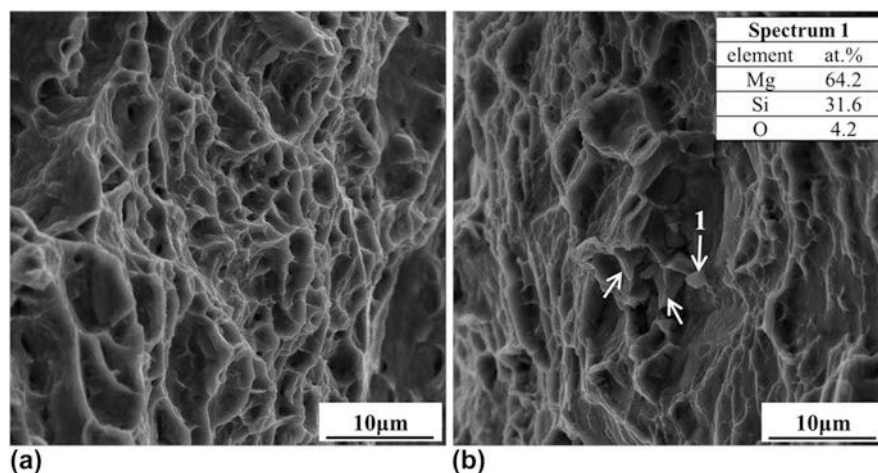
Tensile fracture surfaces of as-rolled Mg–3Al–Zn (a) and Mg–3(Al–Si)–Zn (b) alloy sheets.
